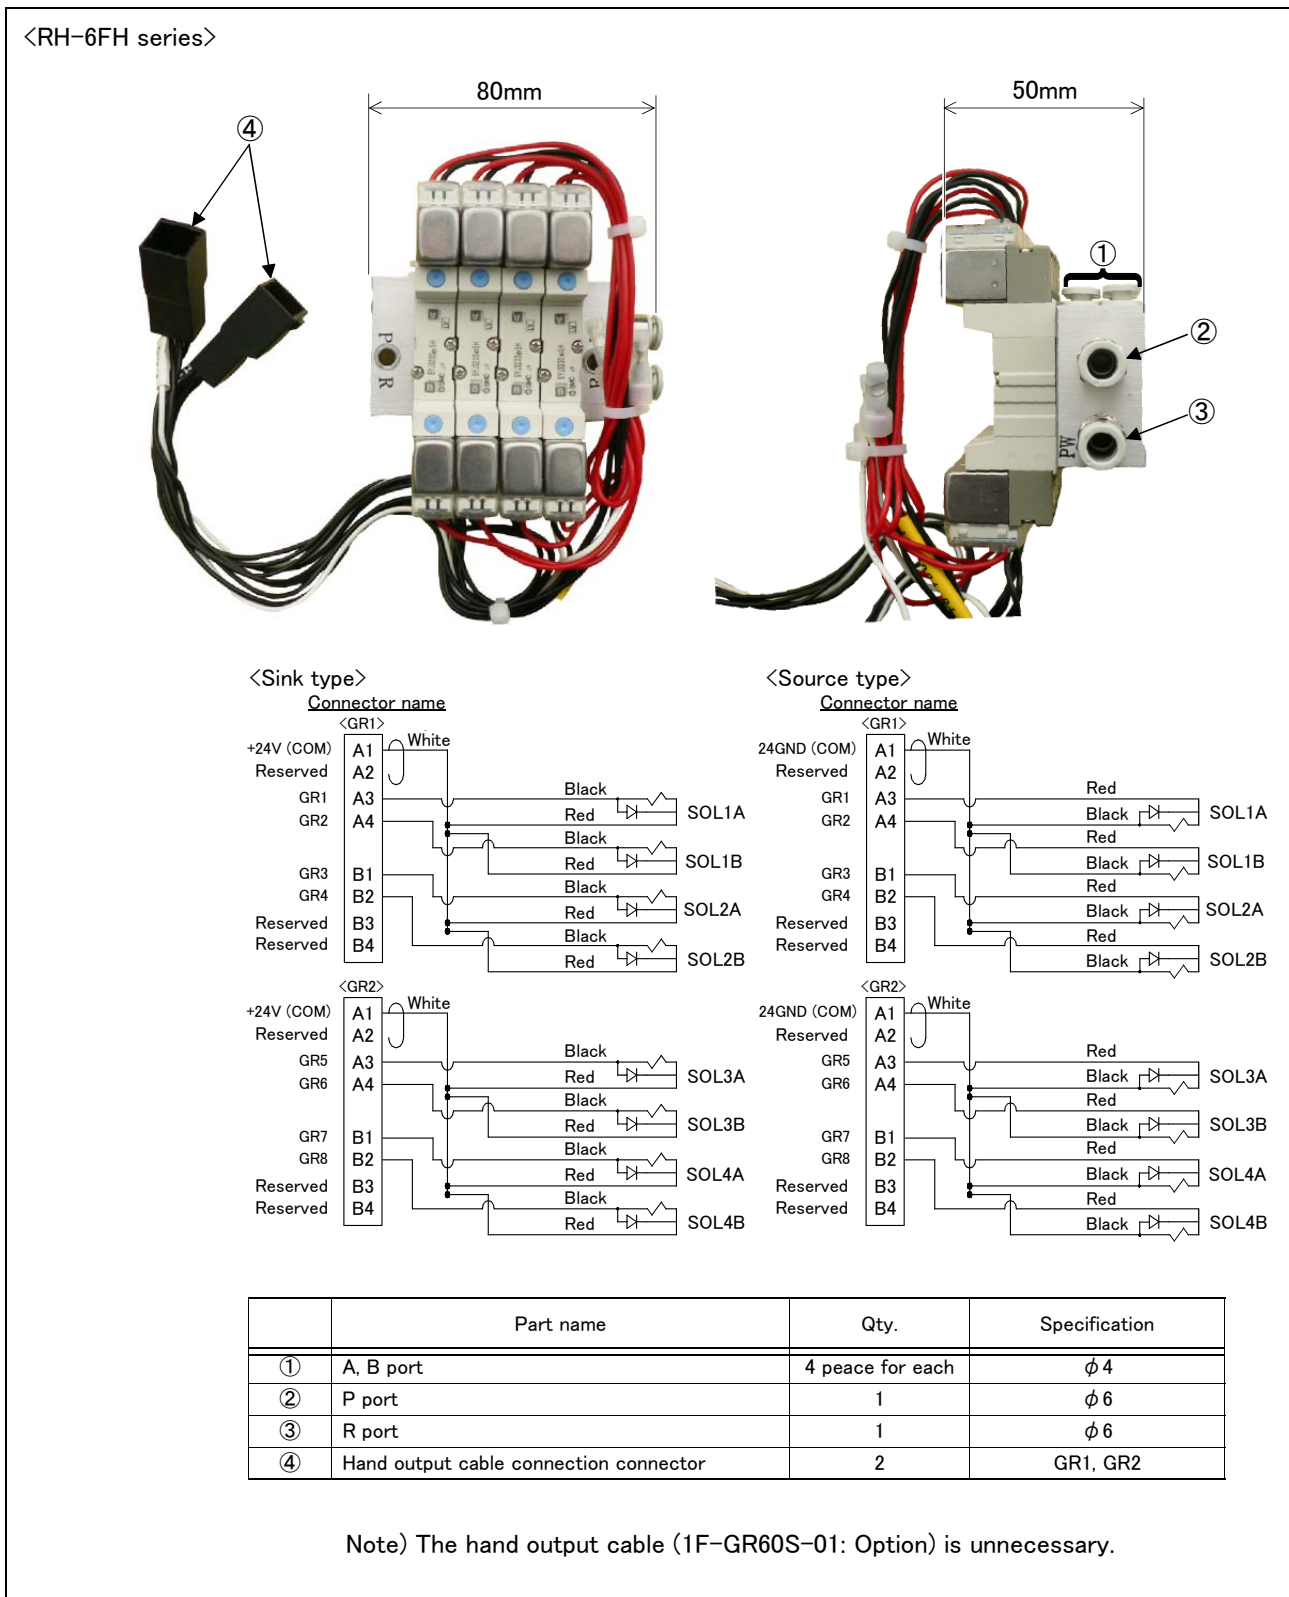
Outline dimensional drawing (RH-6FH series)
